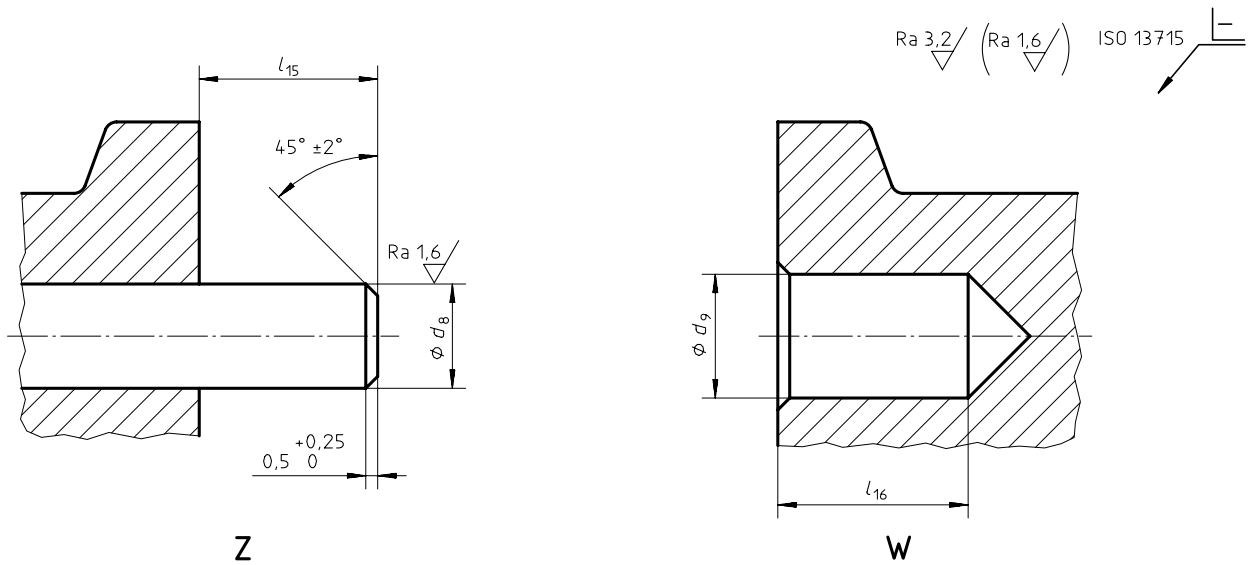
Configuration and dimensions of accessory and engine or gearbox flanges (concluded)
